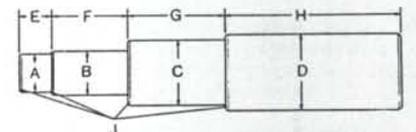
When installing Laycock clutch in all models except 1594 and 1690, use a pilot shaft made to dimensions shown.
